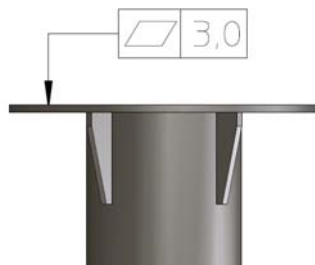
ADU mast flange, recommended flatness on the mast mount plateau
